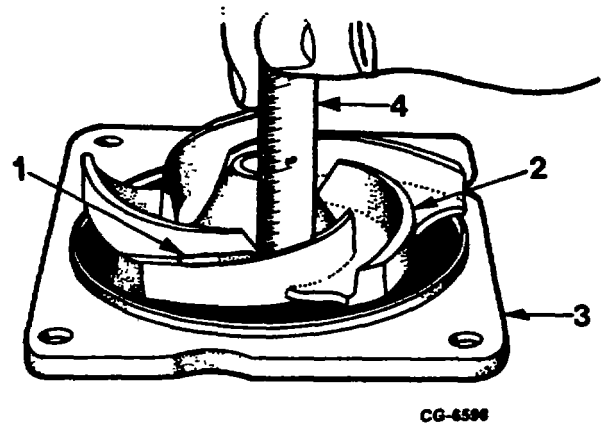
Measuring Thickness of Moulding Clay to Determine Impeller Clearance
